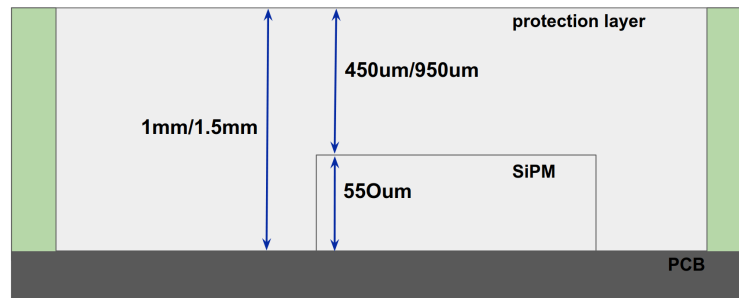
Explanatory drawing of the SiPM with protection layer under study.
